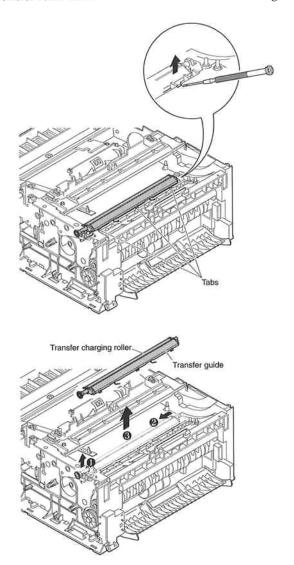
Disassembly Procedure (Transfer Charging Roller)
